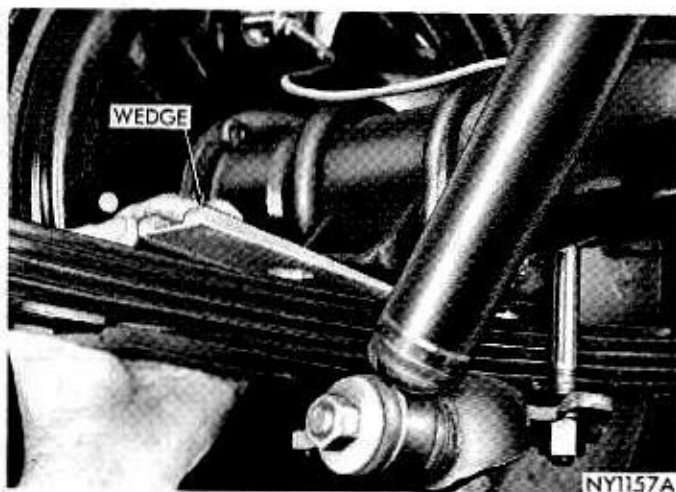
Tapered Wedge Location (Rear Universal Joint Angle Correction)
